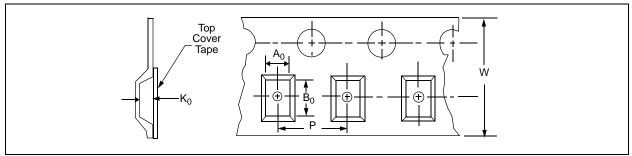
Embossed Carrier Dimensions (8, 12, 16 and 24 mm tape only).
